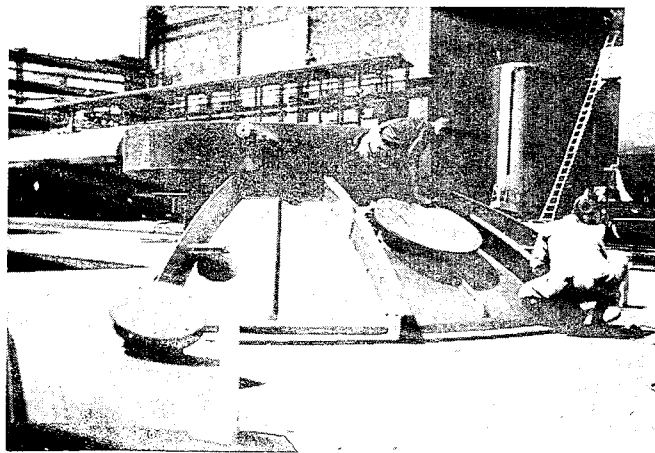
Assembly - C102 Bleach Tower - 20' 2-1/2" I.D. Tower Cover.
